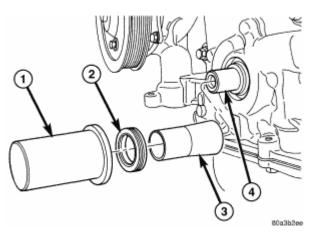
Front Crankshaft Oil Seal Courtesy of CHRYSLER LLC
